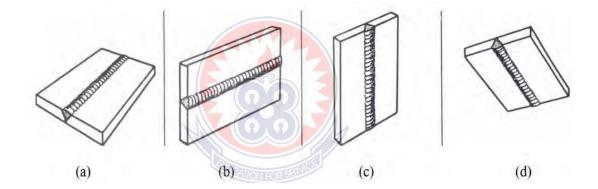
Welding positions (defined here for groove welds): (a) flat, (b) horizontal, (c) vertical, and (d) overhead. (Cary, 2001)
